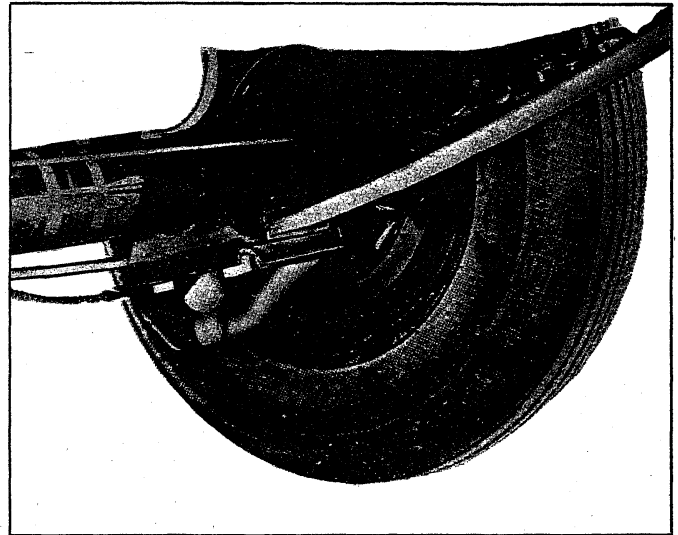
Attachment of Towing Chain Hooks to Axle Tube
